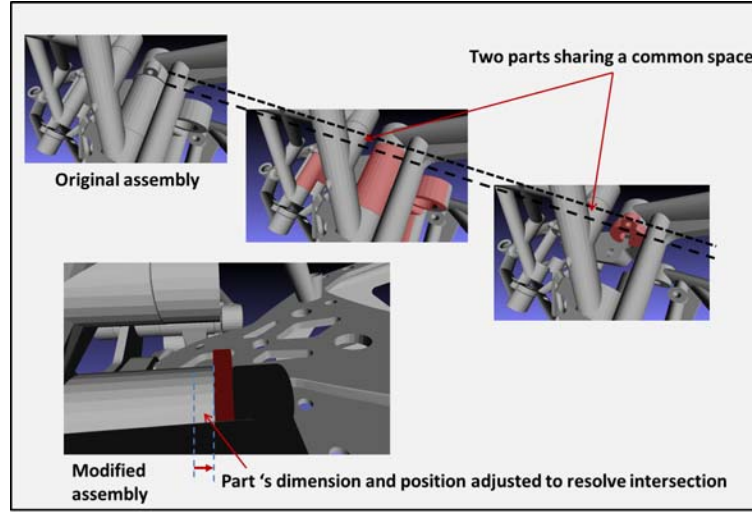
Example of an error in the input CAD model of a complex chassis assembly caused due to intersection between two of its parts
